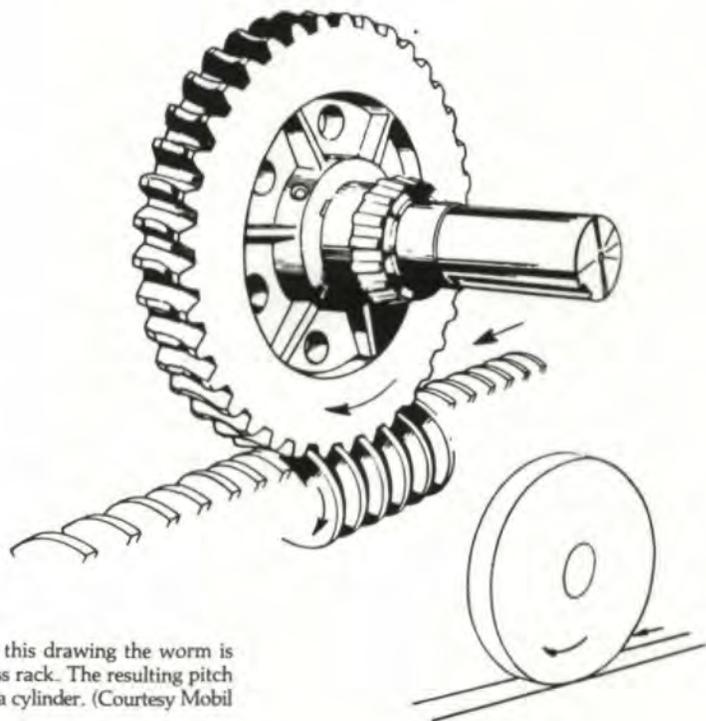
Worm gear. In this drawing the worm is represented as an endless rack. The resulting pitch surfaces are a plane and a cylinder. (Courtesy Mobil Oil Corporation.)
